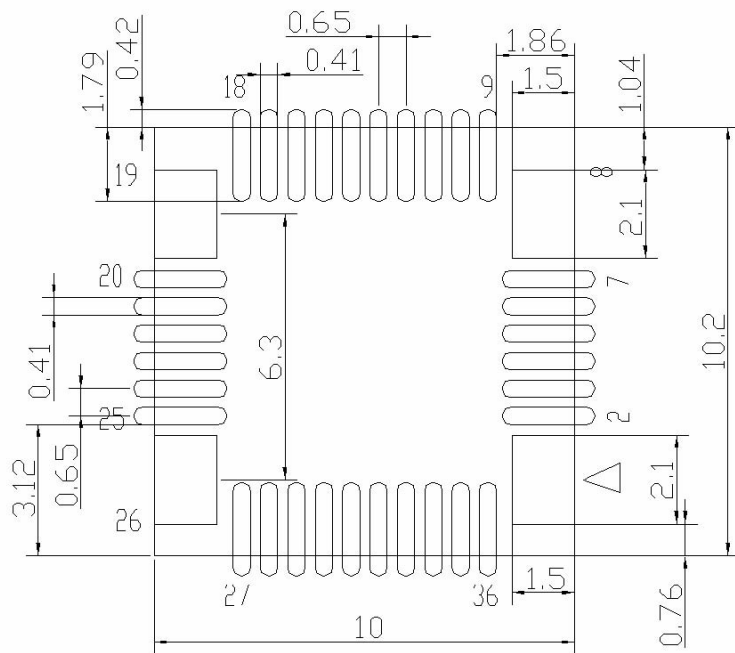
Package Drawing 5.3 Module Pin Location (top view)
